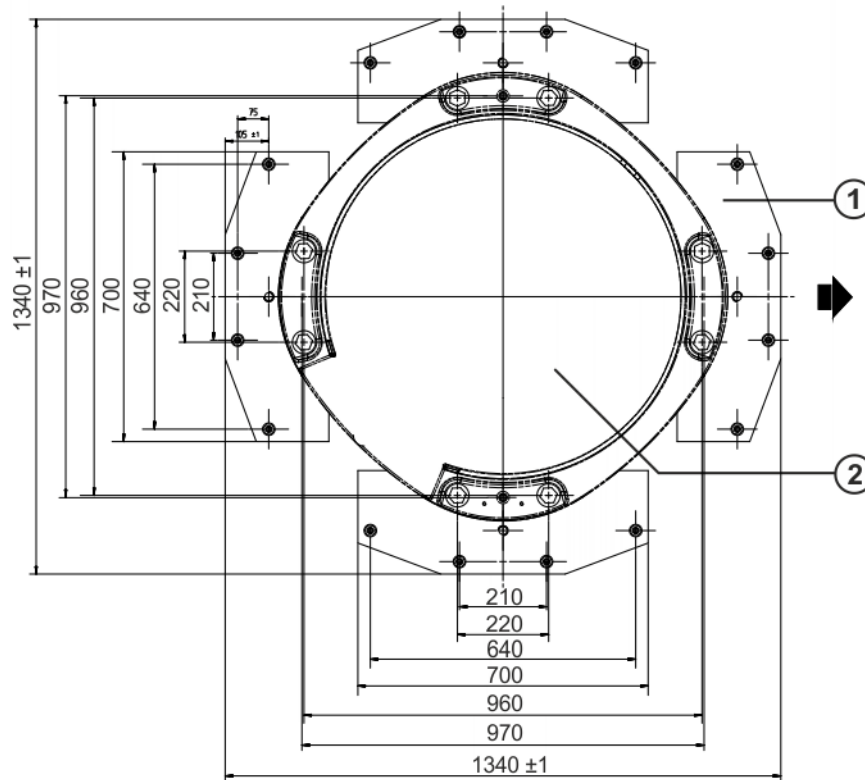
Mounting base 200 mm, dimensioned drawing
